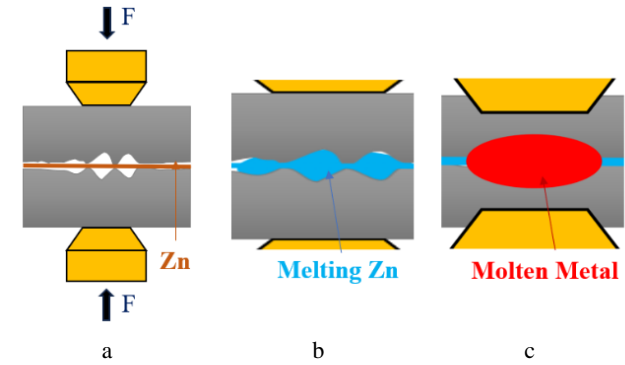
Schematic of the welding process of a joint with an added Zn interlayer: a – before welding; b – in the welding process; c – the nugget morphology after welding
